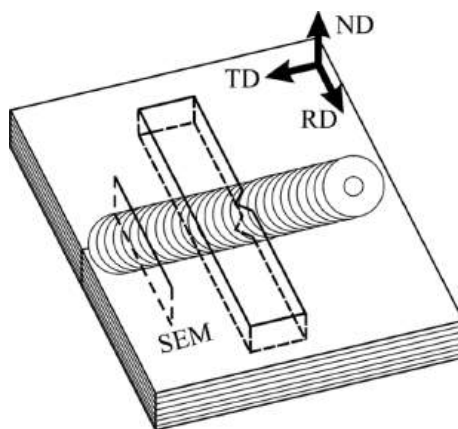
Scheme of specimens preparation from friction stir welding joint.
